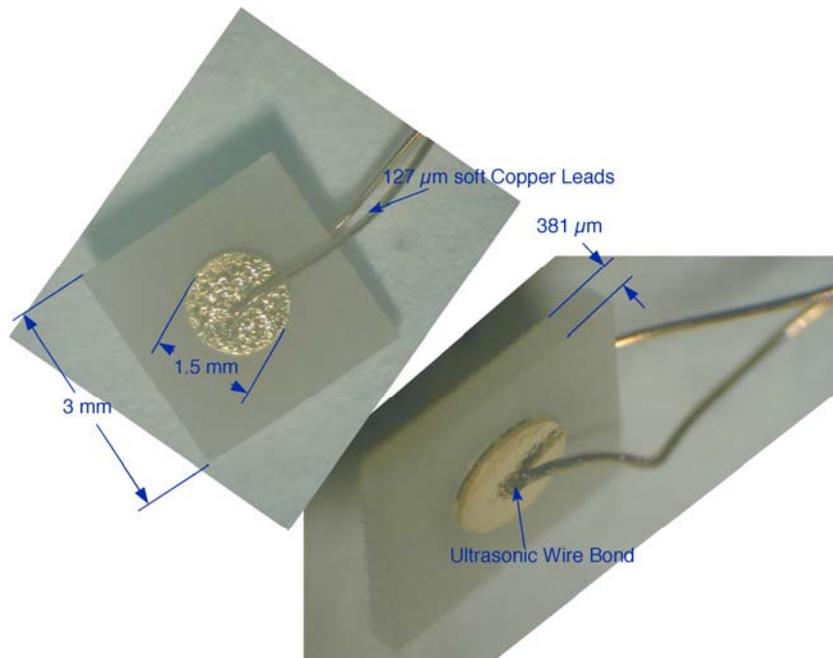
Bare final generation prototype SSFMs using ultrasonic wire bonding
